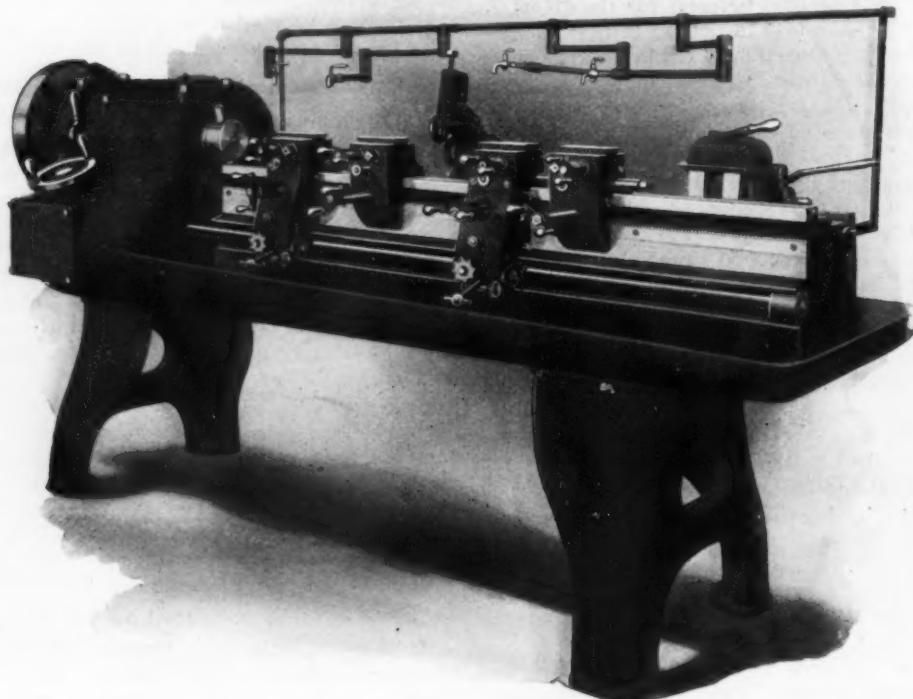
The "Lo-Swing" Lathe, Made by the Fitchburg Machine Works, Fitchburg, Mass.
